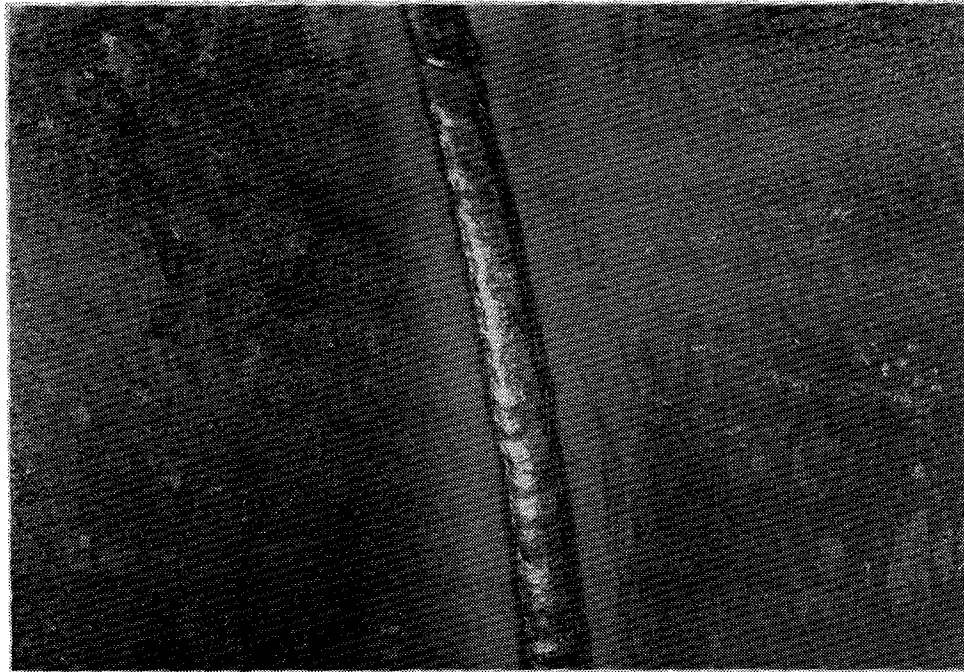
Illustration of Final or Cap Weld, Average External Protrusion of 1/16 In.
